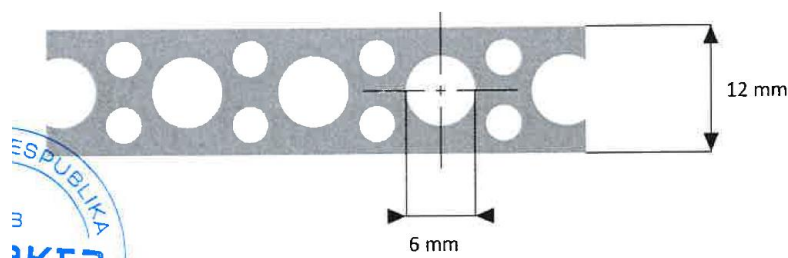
general view and main dimensions of perforated mounting tape
